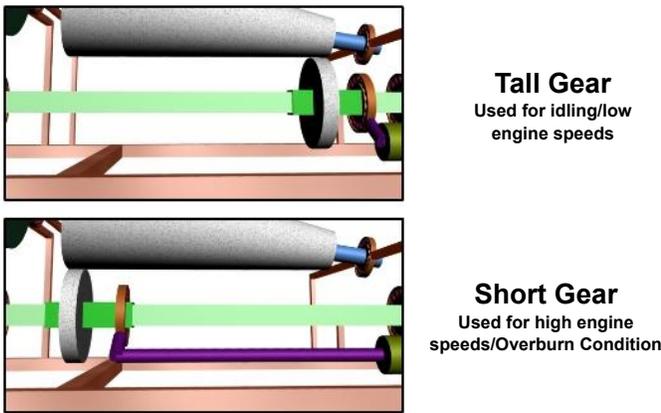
shows how the wheel is moved along x-axis relative to the cone. The wheel rides a sliding column which slides on the main engine shaft. The whole "Wheel-Sliding column" assembly is linearly moved by rack and pinion mechanism powered by encoder based DC motor. Internal side of the ball bearing is fixed with the assembly and the outer is attached to the rack and pinion mechanism. Therefore the whole assembly can be easily moved along x-axis at high rotational speeds.
